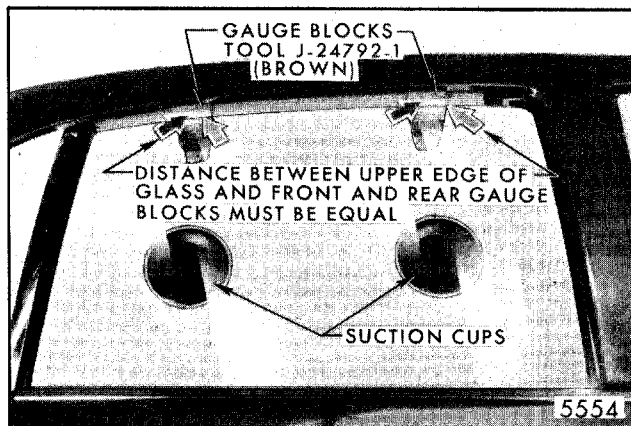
Rear Door Window - Rotated Glass Alignment - "A- 29", 35" Styles
